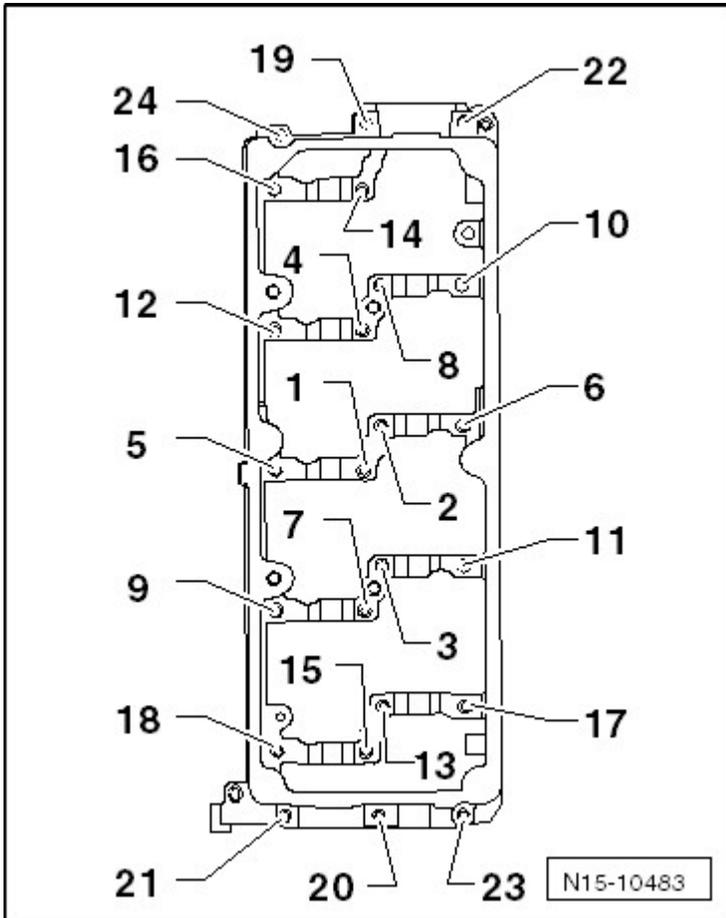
Identifying Bearing Frame Bolts/Nuts Tightening Sequence
